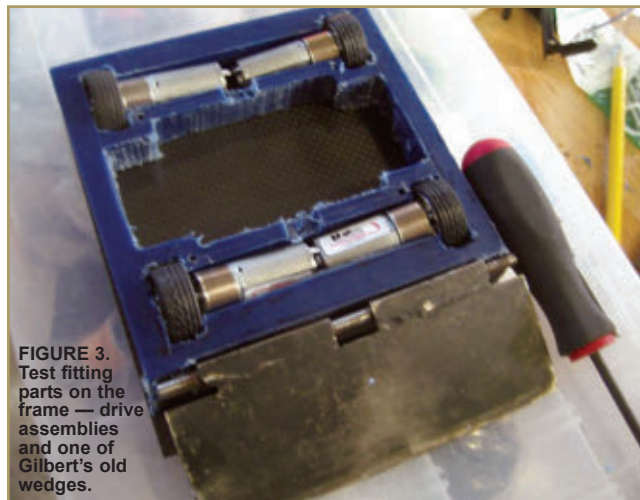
Test fitting parts on the frame — drive assemblies and one of Gilbert's old wedges.
